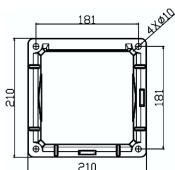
Base dimensions of PTZ camera (unit: mm)
